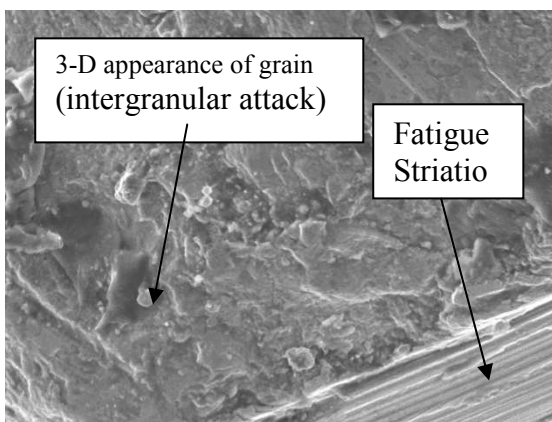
SEM Fractograph of failed valve end (weldment) of nipple, x700
